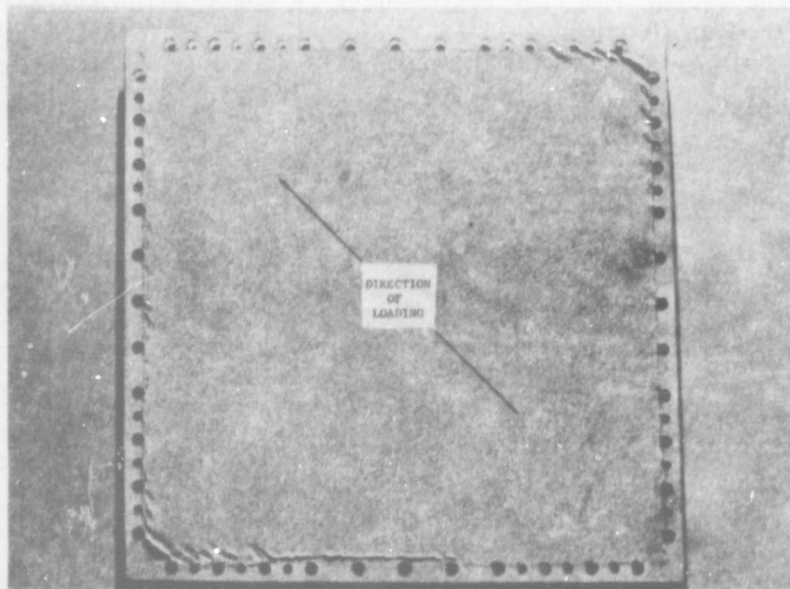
PANEL 7 TESTED IN EDGEWISE SHEAR AT ROOM TEMPERATURE. CRACK AROUND PERIPHERY OF THE PANEL AT THE LOAD HOLES IS IN COATING ONLY
